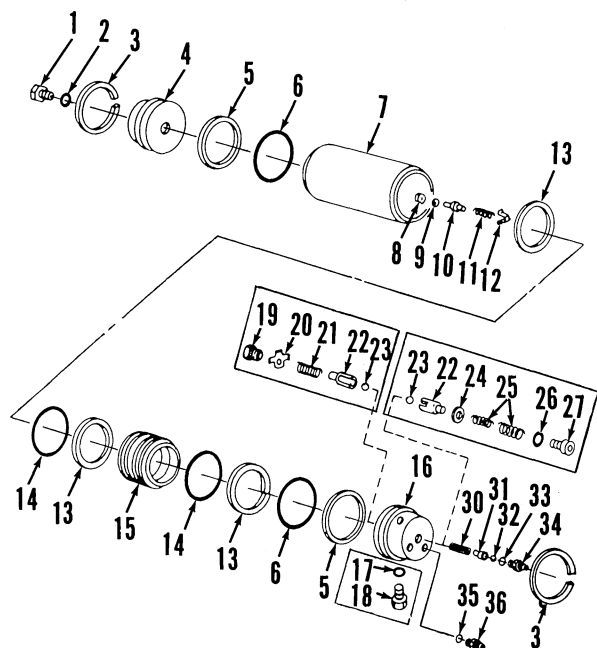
Exploded view of brake accumulator. Parts shown in insets are used on early models.
